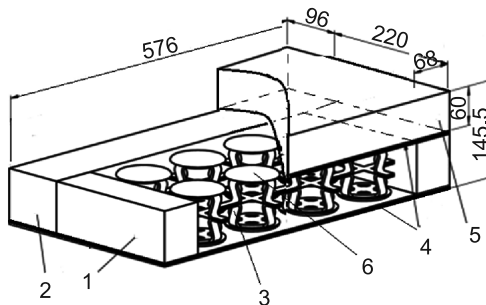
Seat structure (seat B): 1, 2 – seat frame; 3 – spring, 4 – felt, 5 – foam upholstery, 6 – cover of spring (dimensions [mm])
